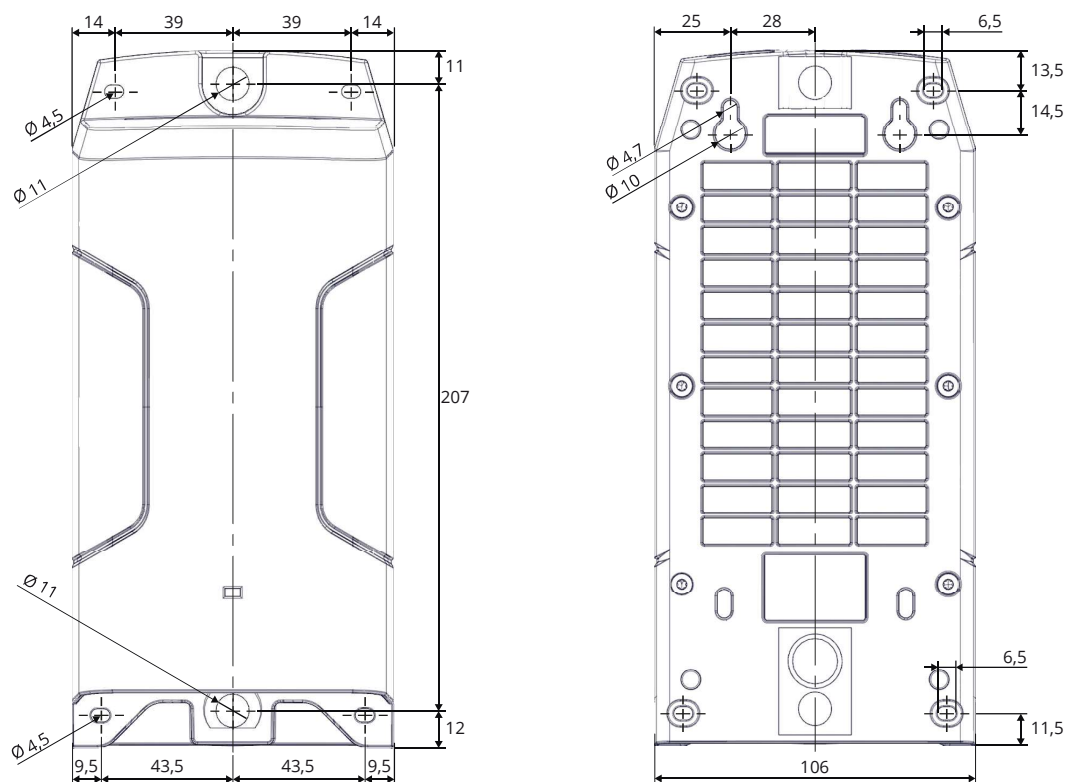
BL-EPS-1005 (top, bottom), dimensions in millimeter
